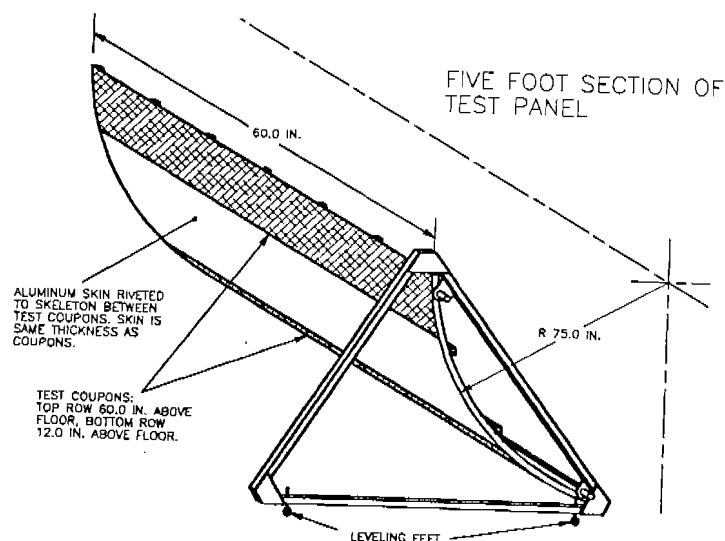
Assembly of five-foot test section with test specimen and end supports.
